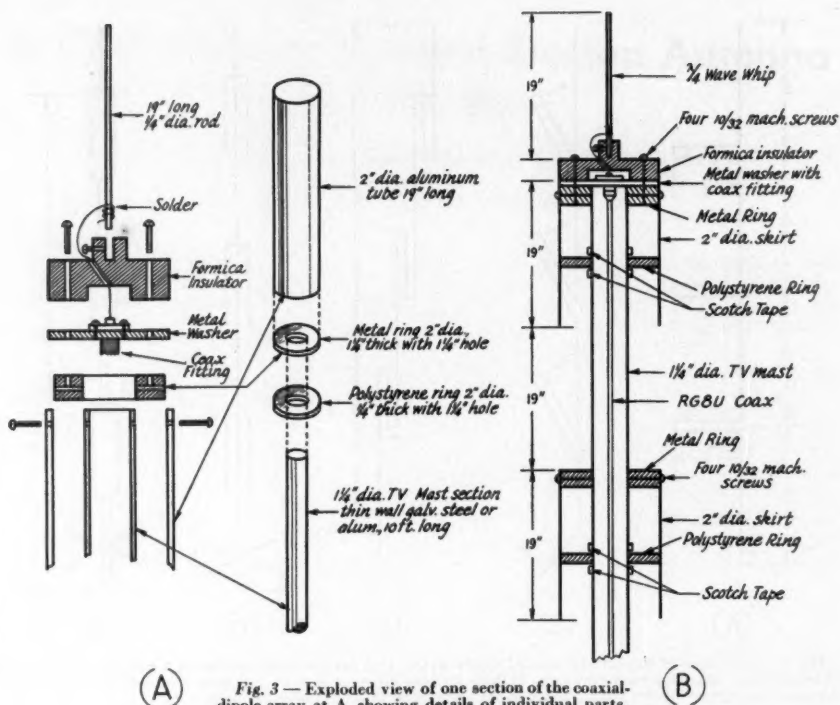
Exploded view of one section of the coaxial-dipole array at A, showing details of individual parts. Assembled view, B, shows how the parts go together.
